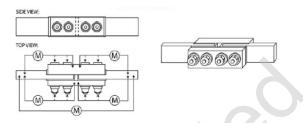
(b)- 2: Gauge Plate - Flat Insulating Plate Style
